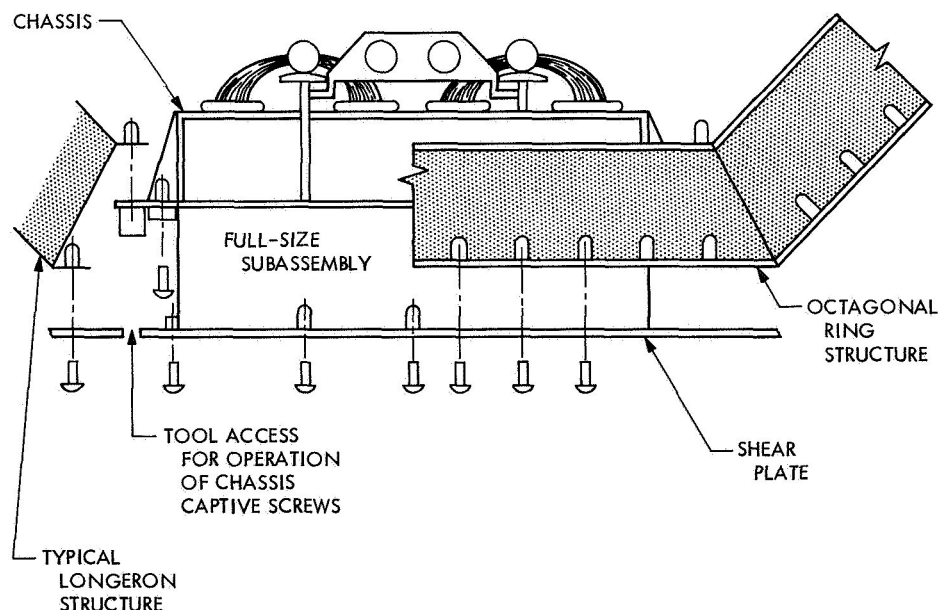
Installation of PIE electronic assembly into octagonal structure bay
